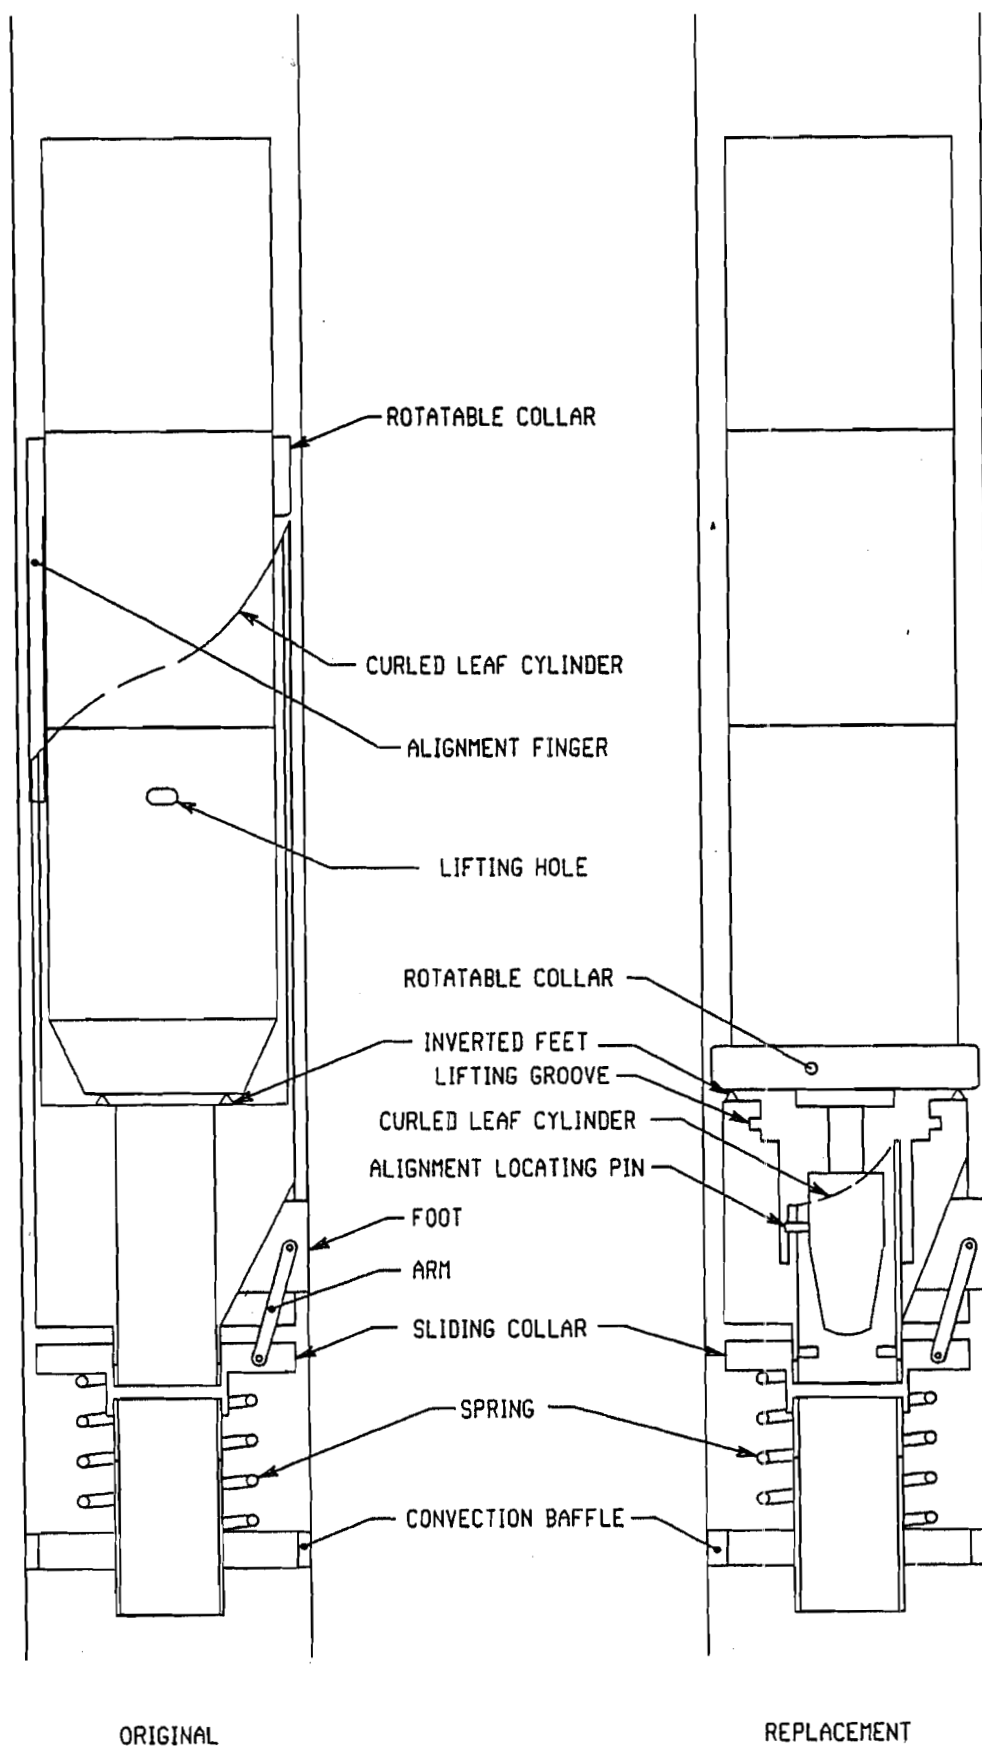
Sections of Holelock Mechanisms with Seismometer Package Installed
